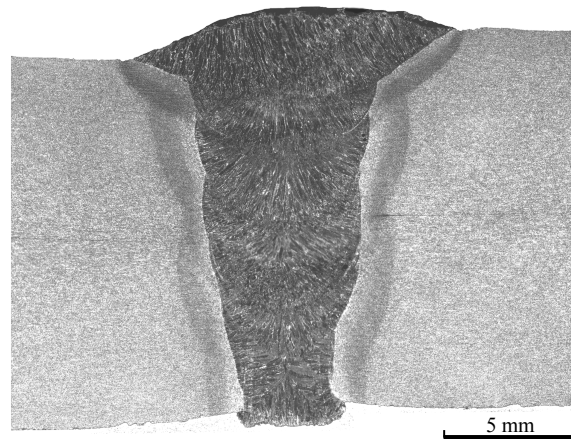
GMAW welded X70 pipes: section of weld after 2 % nital etching.
